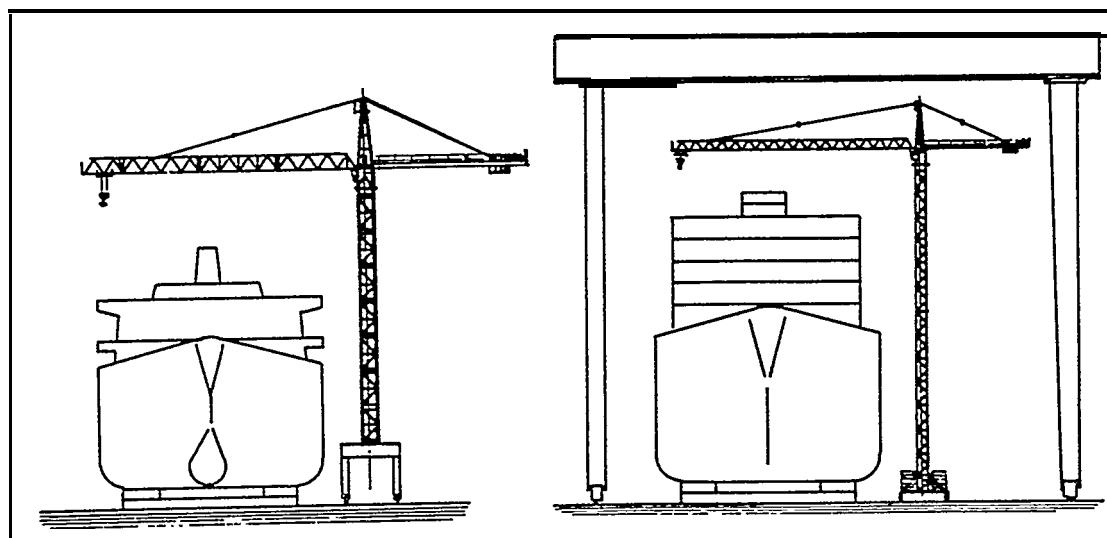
Temporary installations of tower cranes in dry-berth use and for use with tall superstructures
